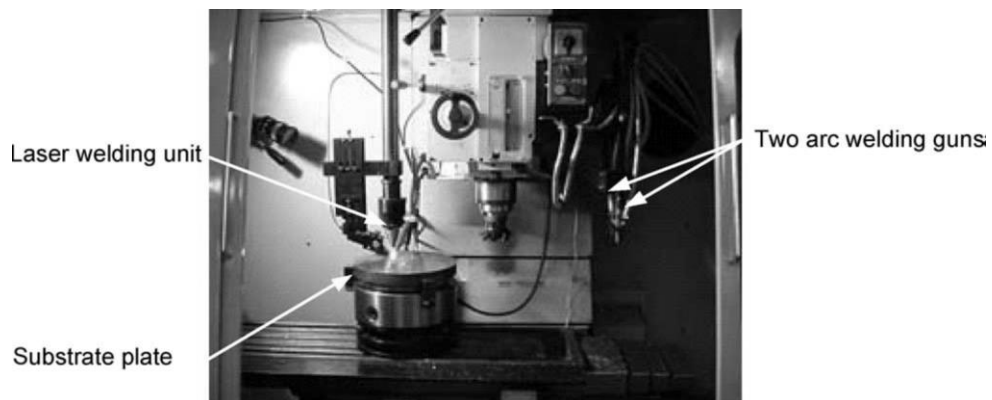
Integrated welding and milling machine created by Song et al. [31]
